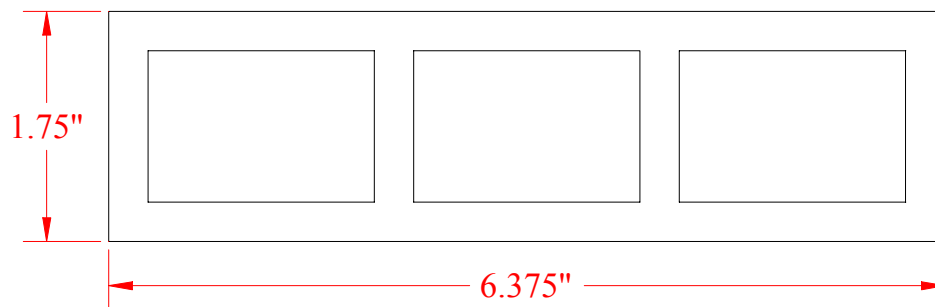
Triple-box section. Outside dimensions remain constant. However, wall thickness varies between 0.2 inches, 0.3 inches, and 0.4 inches.
